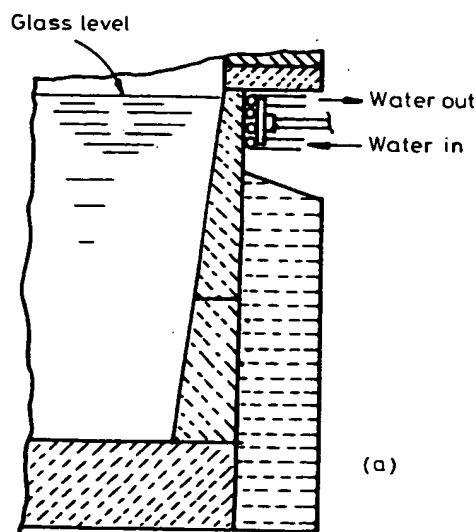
Alternative arrangements for preventing side wall blocks falling into the melter. An example of flux line cooling by means of water pipes is also shown.
